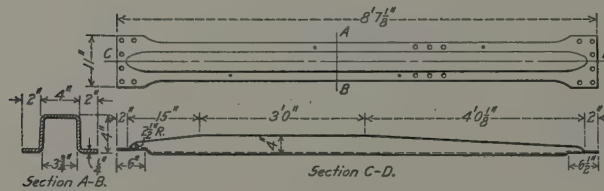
Pressed Steel Side Post Used on Pennsylvania Steel Frame Box Car Shown in Figs. 21 and 22.
